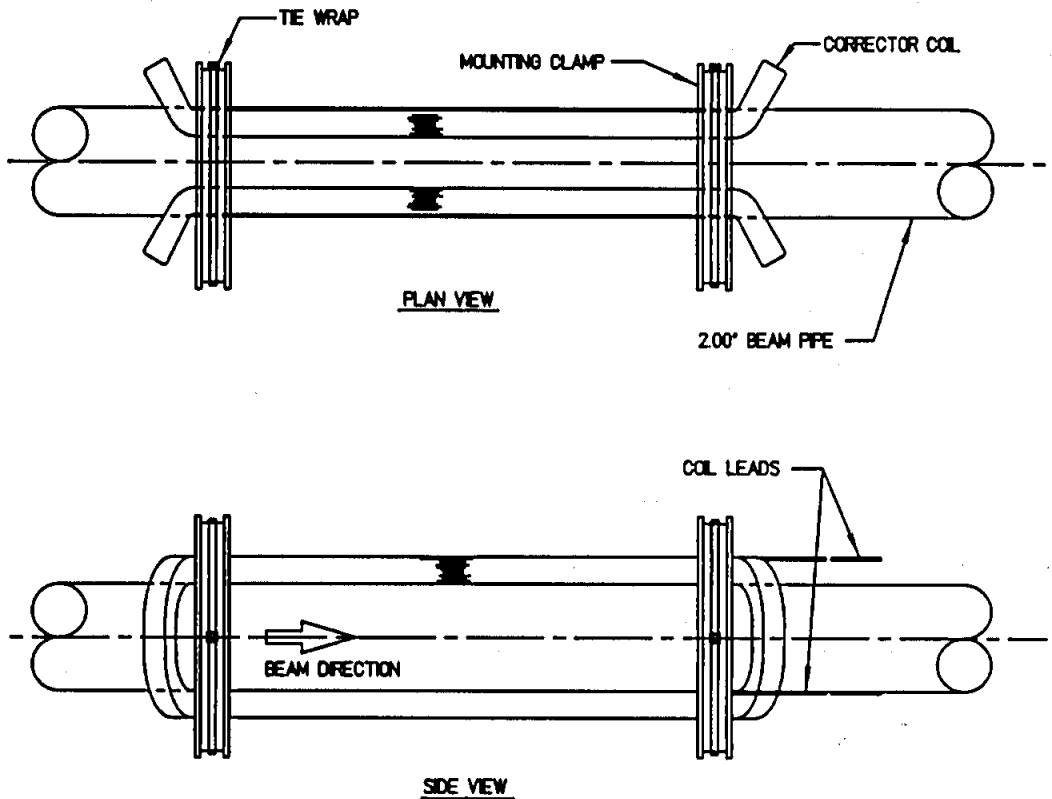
Assembly drawing of a deflecting magnet mounted to a section of beam pipe. Figure courtesy of D. Machie.
